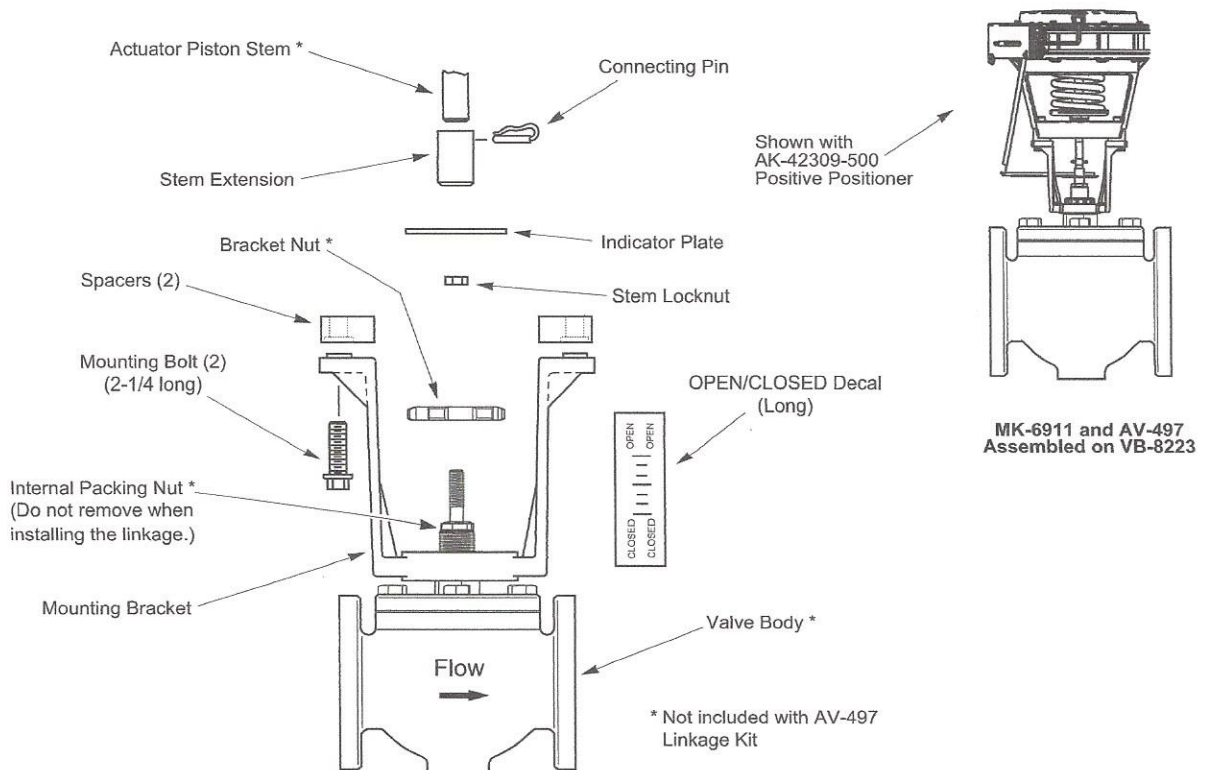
Valve Linkage Assembly for MK-6911 Actuator on 6" VB-8223 Valve.
